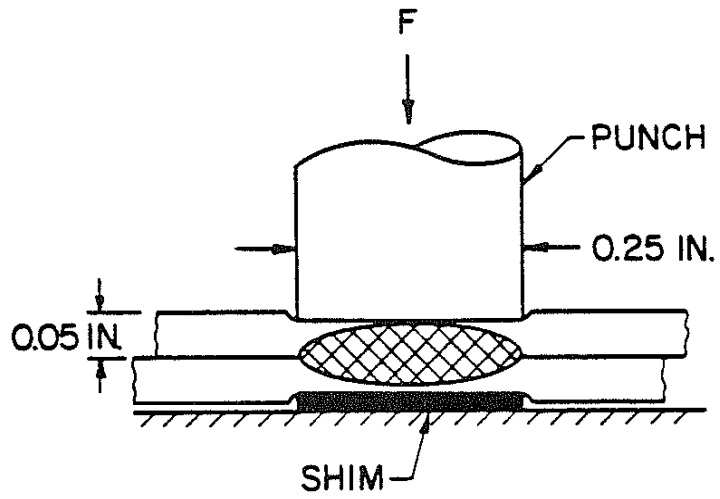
Schematic Drawing of Coining Post-Weld Treatment.
